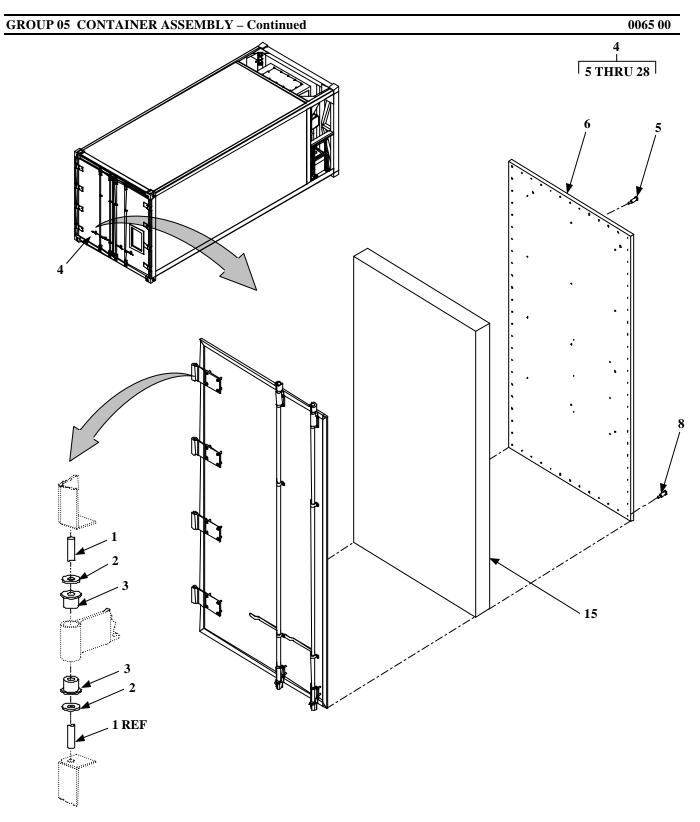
Left Hand Door Assembly (Sheet 1 of 3)
